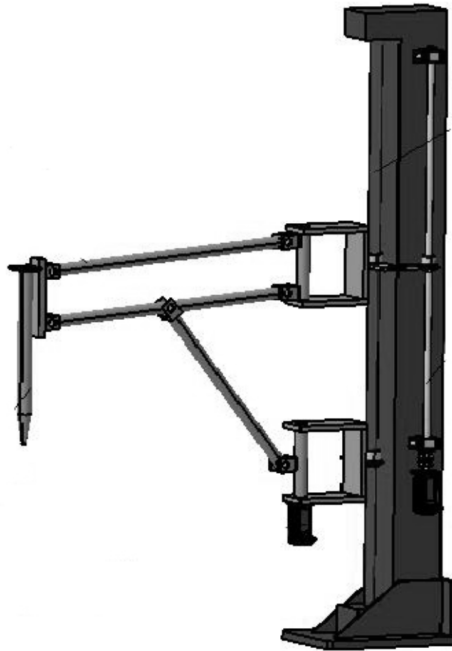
Manipulator model of cylinder head bolt screwing of automobile engine
